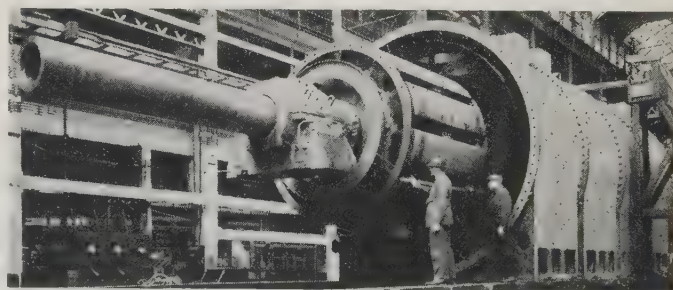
Rotor assembly of 60,000 kva frequency converter
